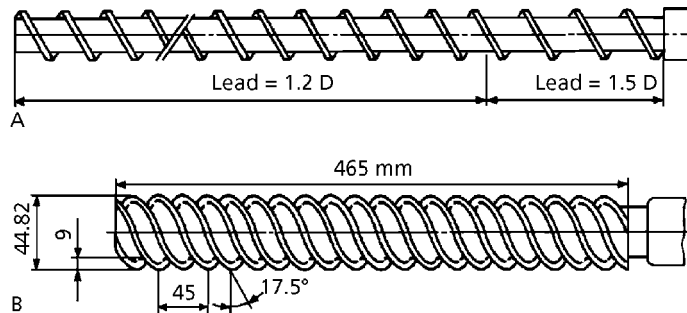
Screw geometrics of NRM extruder (A) and Monsanto extruder (B).
